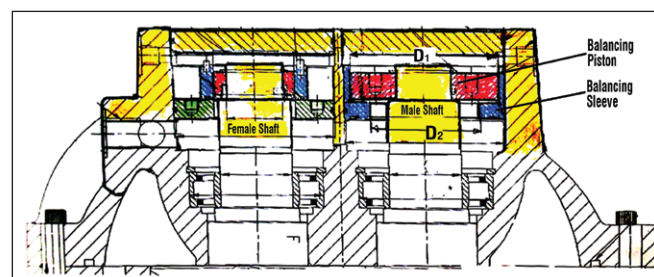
Balancing piston system fitted on male rotor shaft at discharge end
